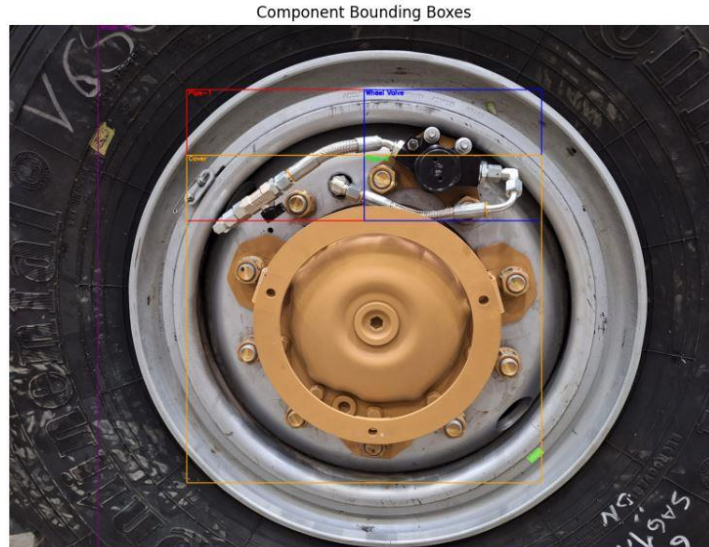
Labeled components, wheel valve, pipes, wheel rim
